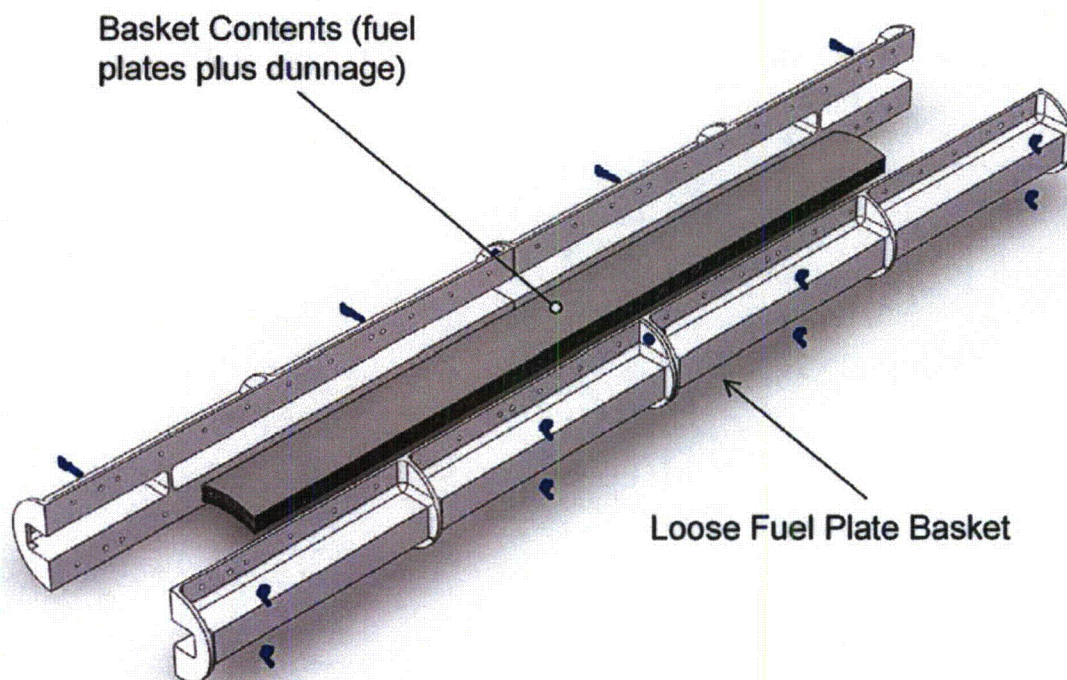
Loose Fuel Plate Basket – Exploded View
